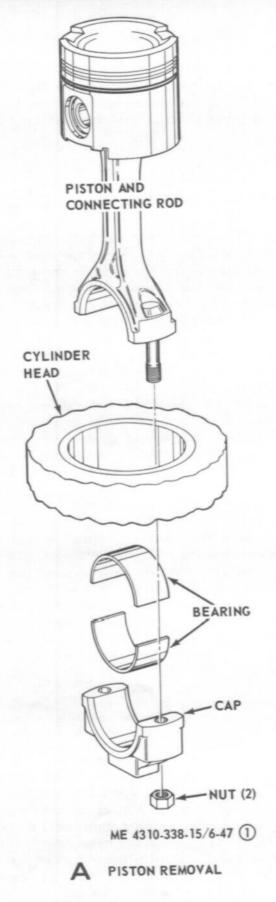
Pistons and connecting rods, removal and installation, (sheet 1 of 2).
